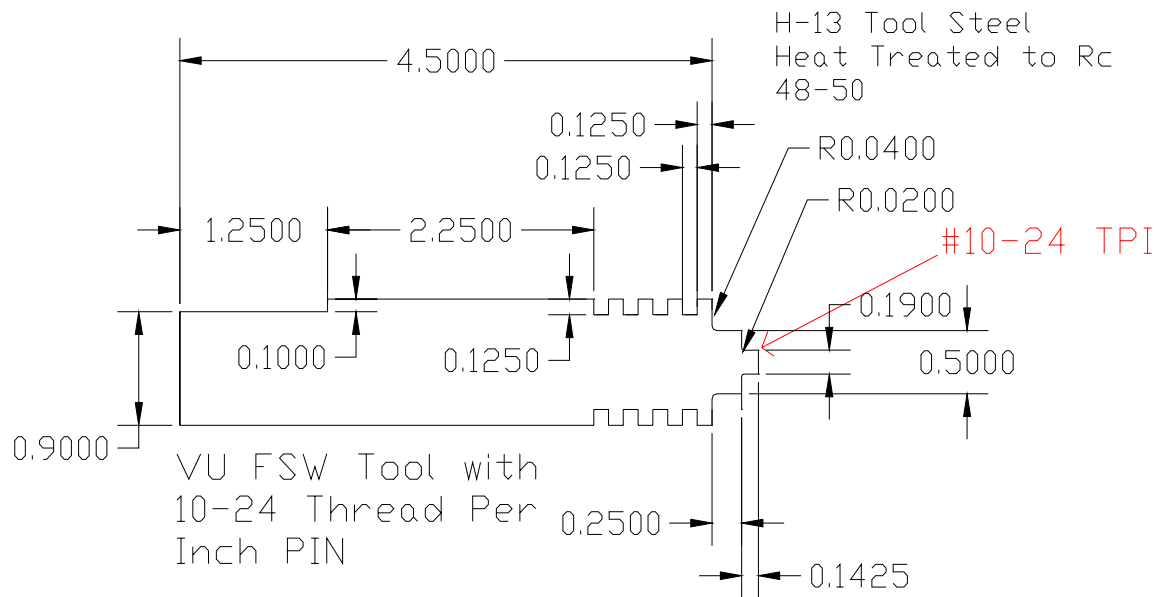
VU FSW tool with 0.5” shoulder and left hand 10-24 thread pattern.
